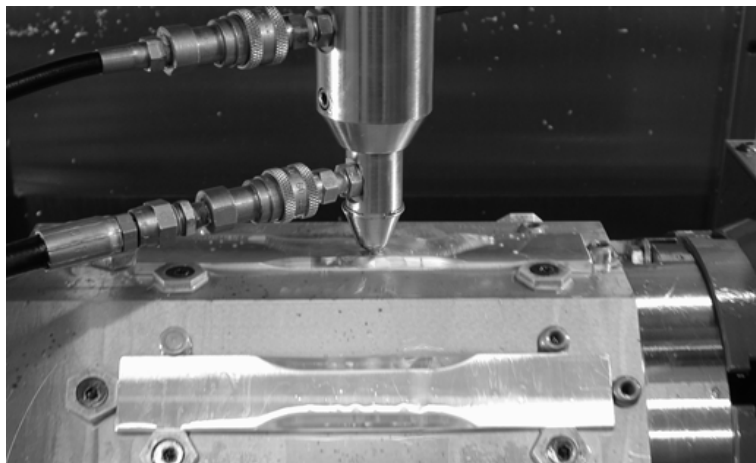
A set of fatigue samples being LPB processed on a CNC milling machine.
